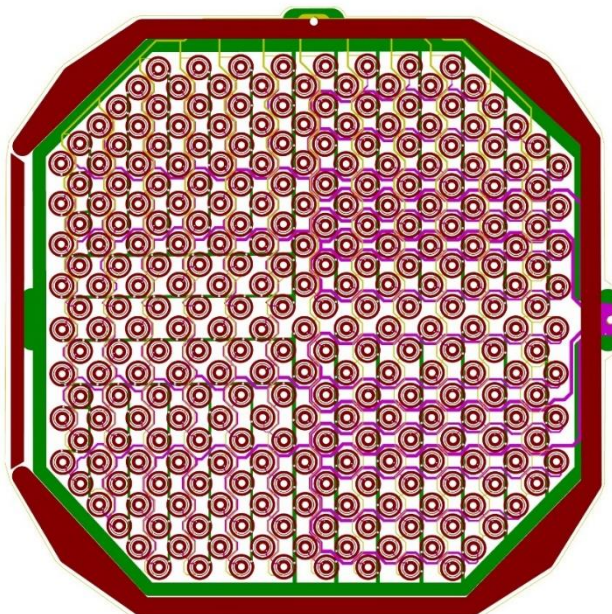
Front side view of the concentric array II prototype by 'PCB layout editor' back-plate copper tracks (green) for driver electrode connection, front-side copper tracks (red) with array of sensor probes and shielding bracket, 2 inner layer copper tracks to connect sensor and sink electrodes separately via micro-vias. Driver and sensor electrode connections located at copper pads on both left and right-hand sides of the laminate. Upper located pad serves as sink electrode connection (ground).
